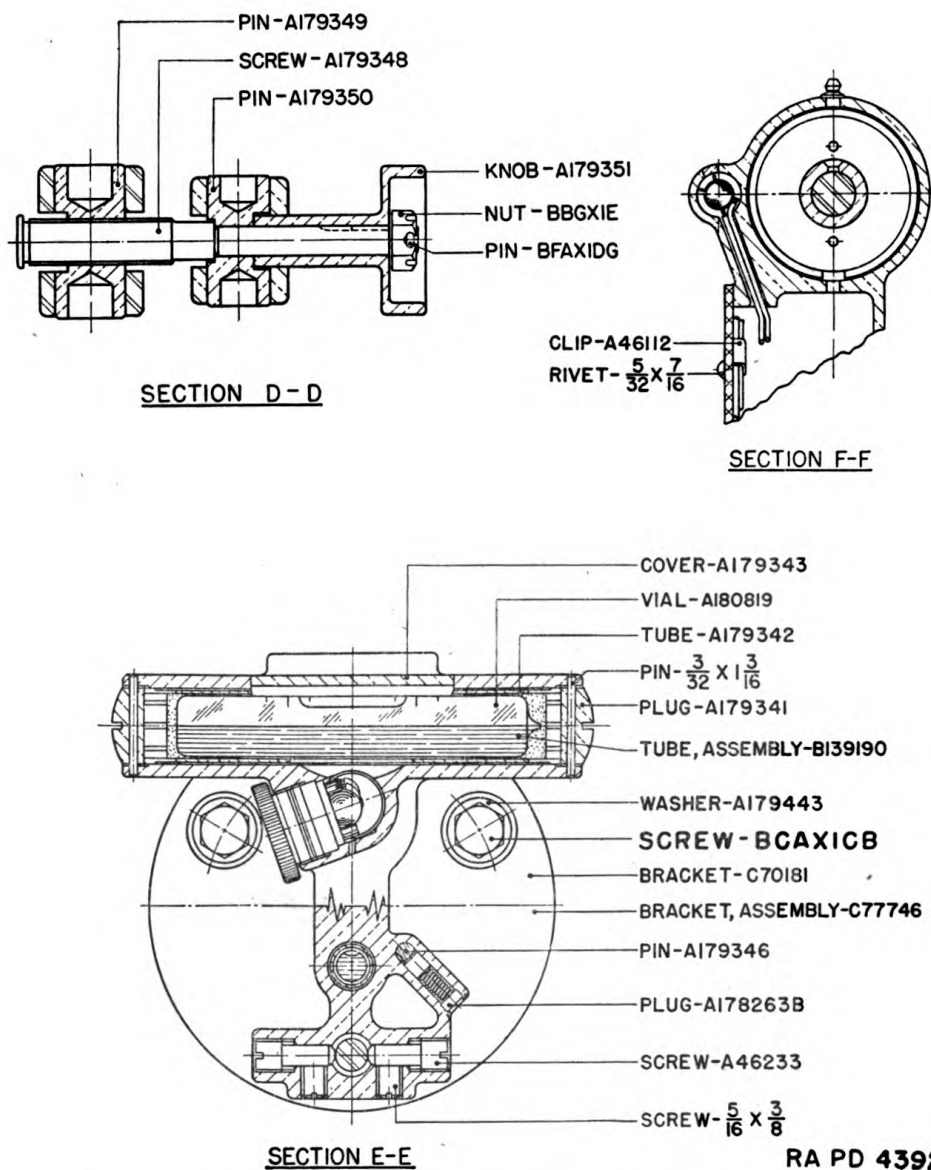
Elevation quadrant M1—sectioned views D-D, E-E, and F-F.
